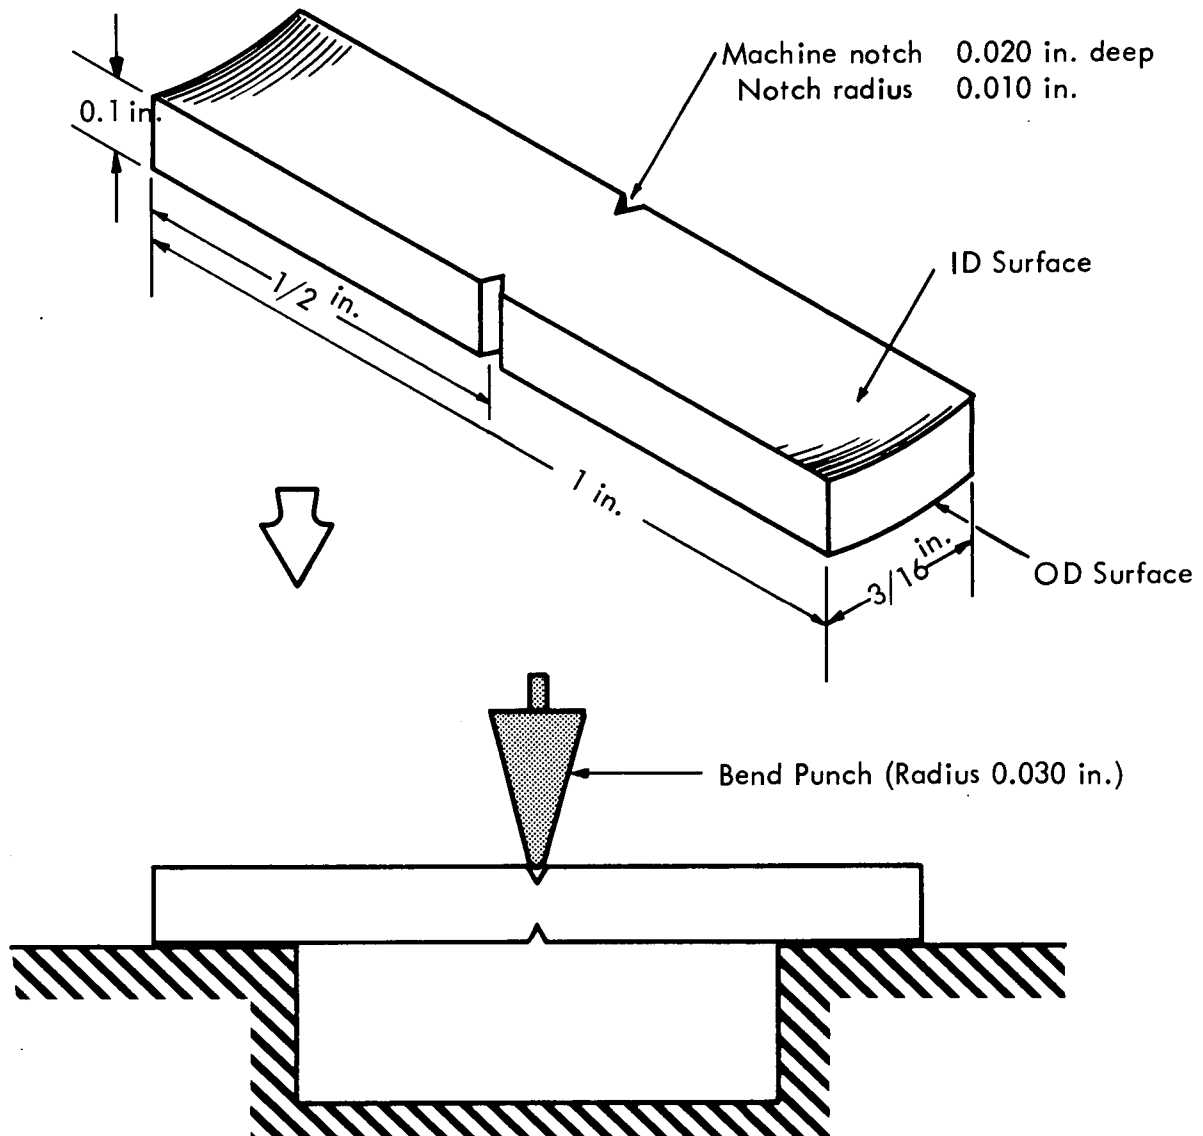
Geometry of T-111 Tube Specimens Used for
